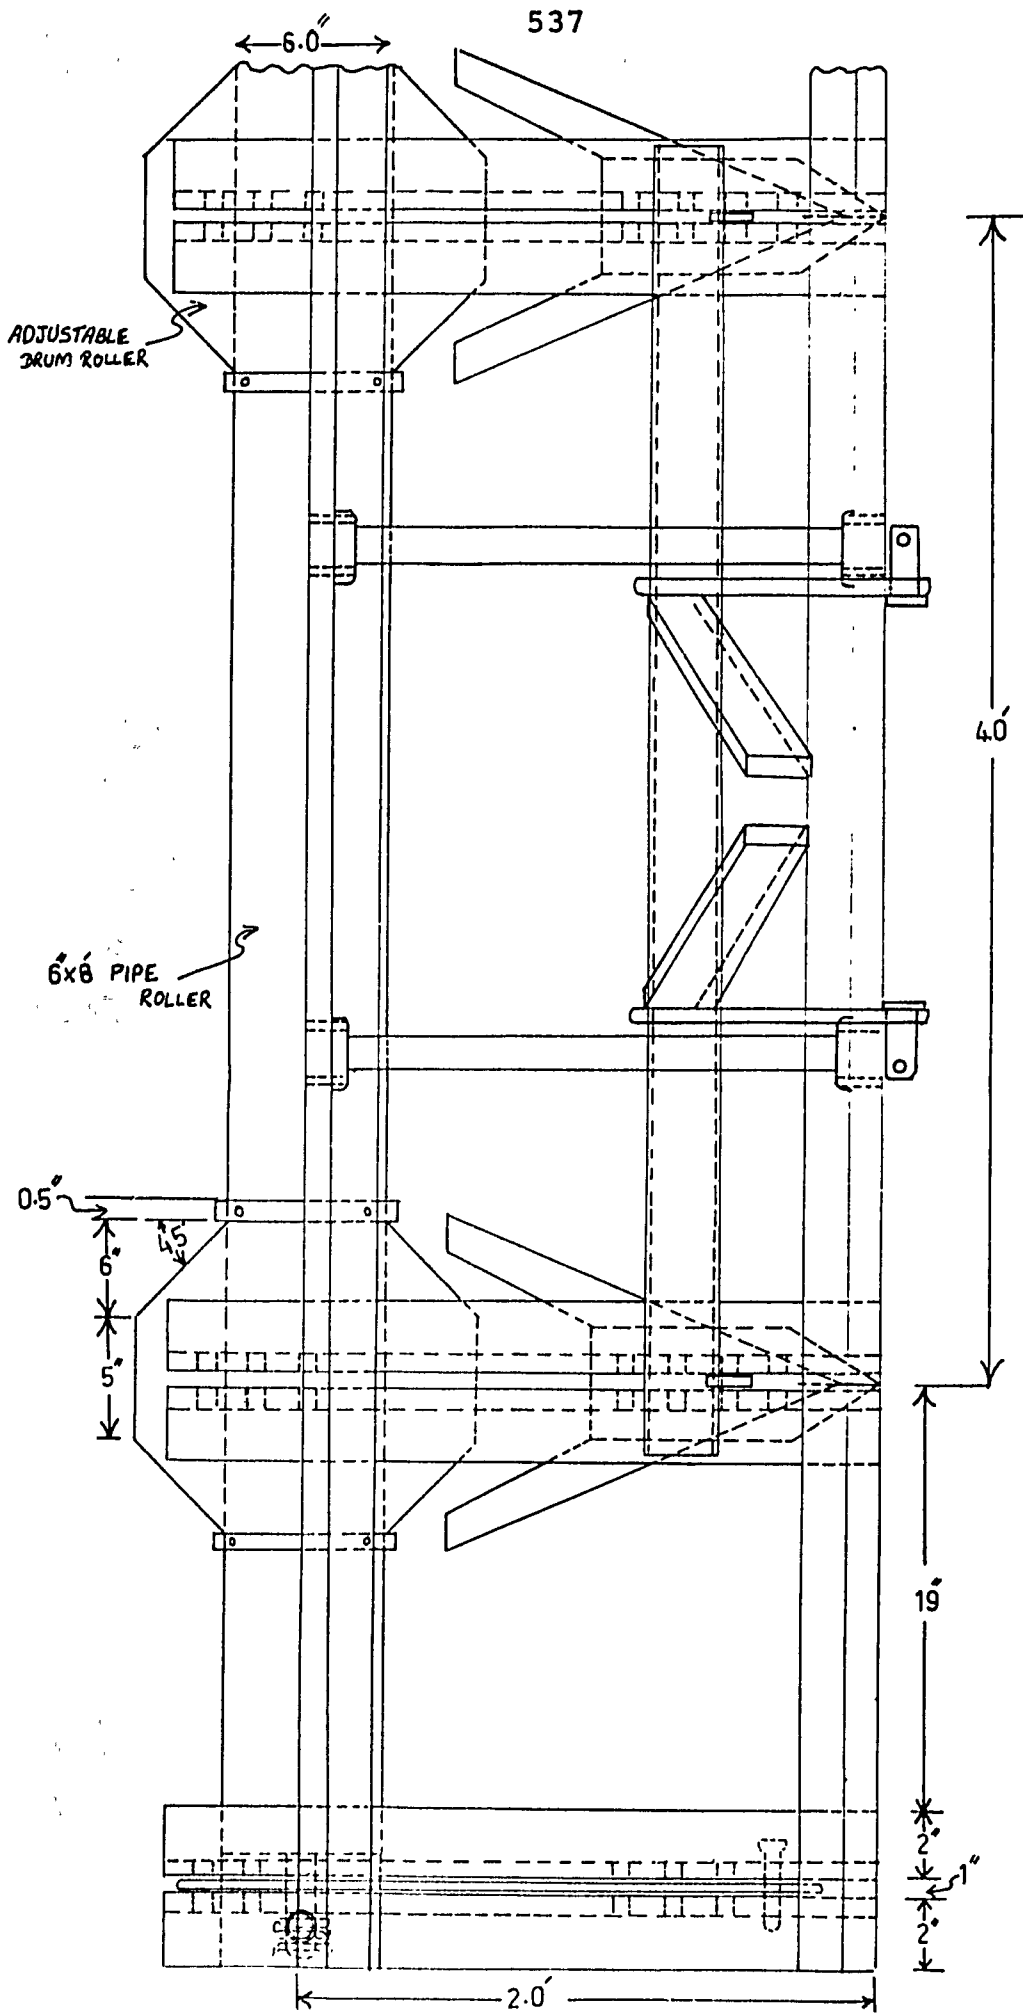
Plan view of bedshaper showing frame, furrow openers, and roller assembly.
